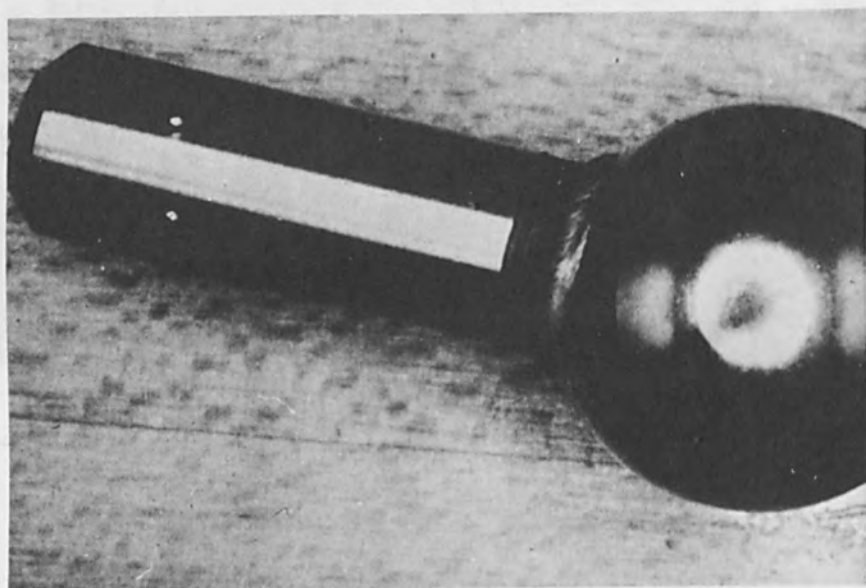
Ball bearing, 0.5-in. in diameter, welded to a 3/16-in.-diam. dowel pin to produce an accurate locator.
